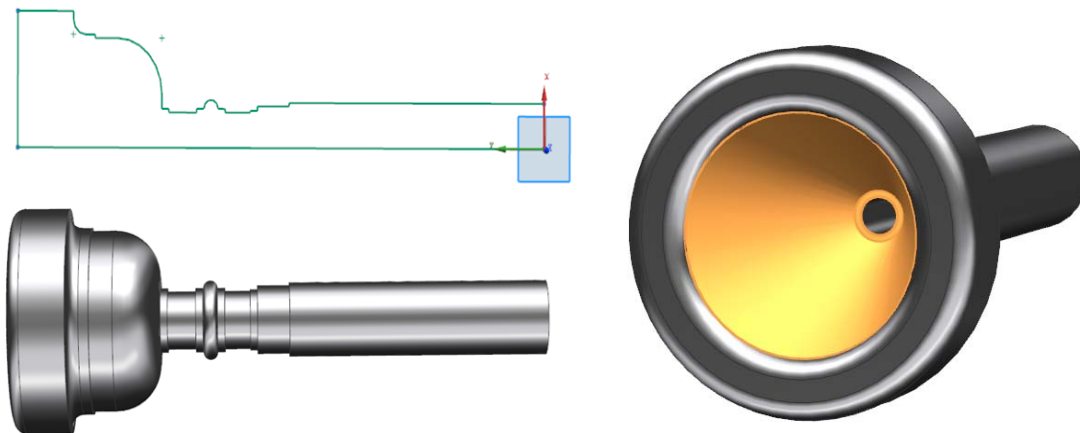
Left – Mouthpiece and sketch. Right - Tapered hole.
